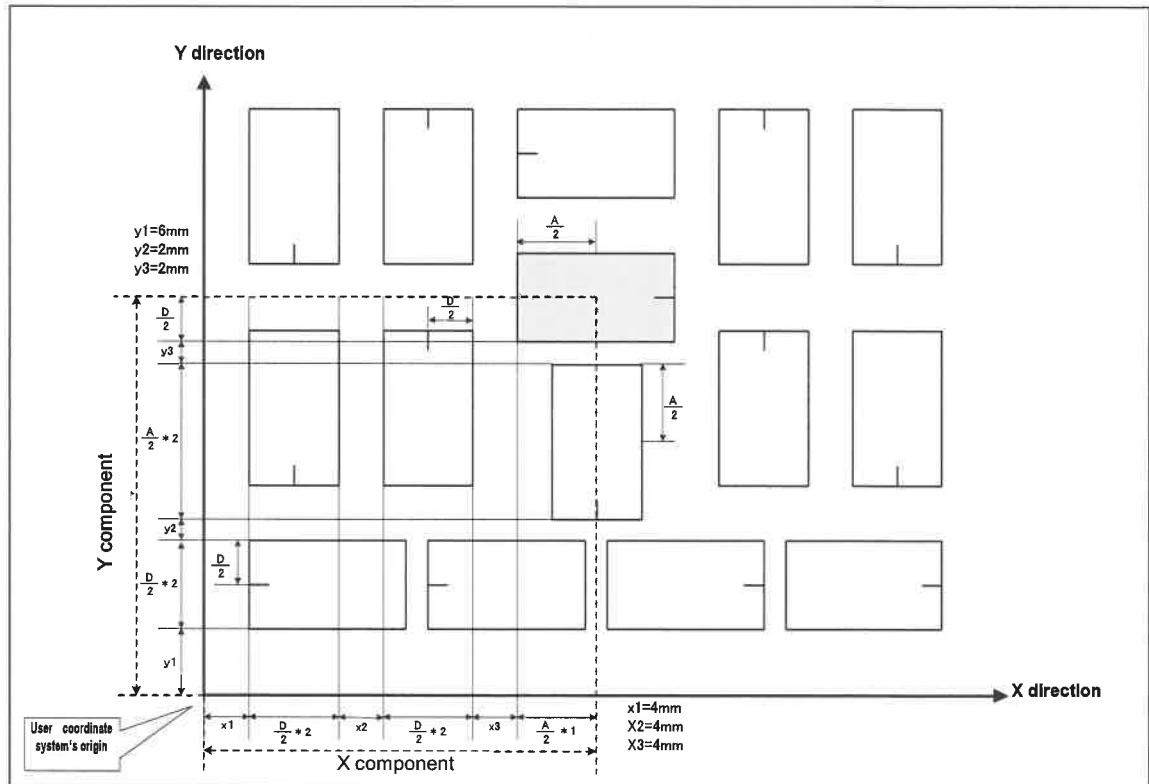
Definition of workpiece locations when fixed gaps are provided between the workpieces
